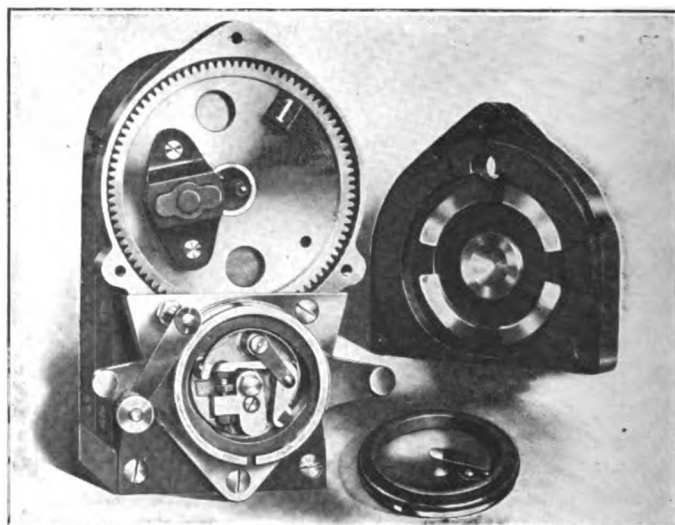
End Cover and Distributor Plate Removed from Simms Magneto to Show Circuit Breaker Mechanism and Distributor Brush, Segments, Etc.
